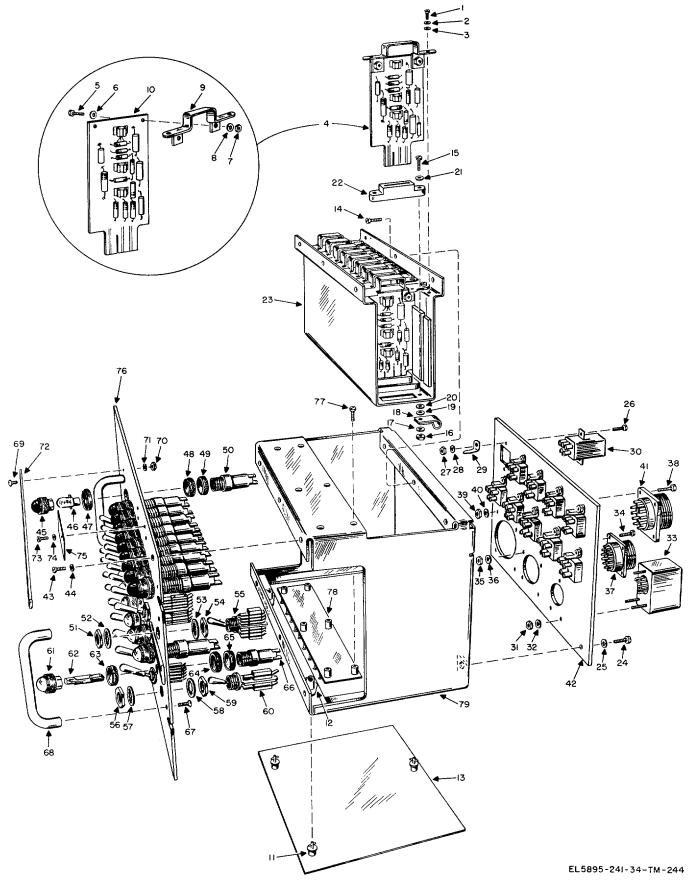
Control-Monitor C-434/FSW-8 (part of OA-014/FSW-8), exploded view.
